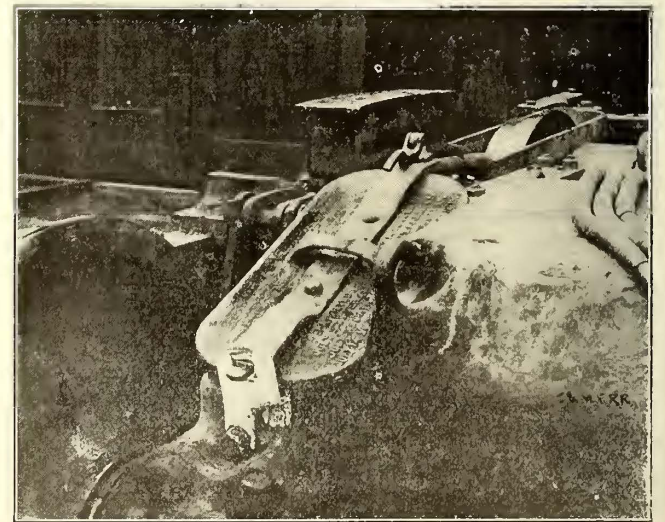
Maintenance of Equipment—Improved Motor Lid Fastening
